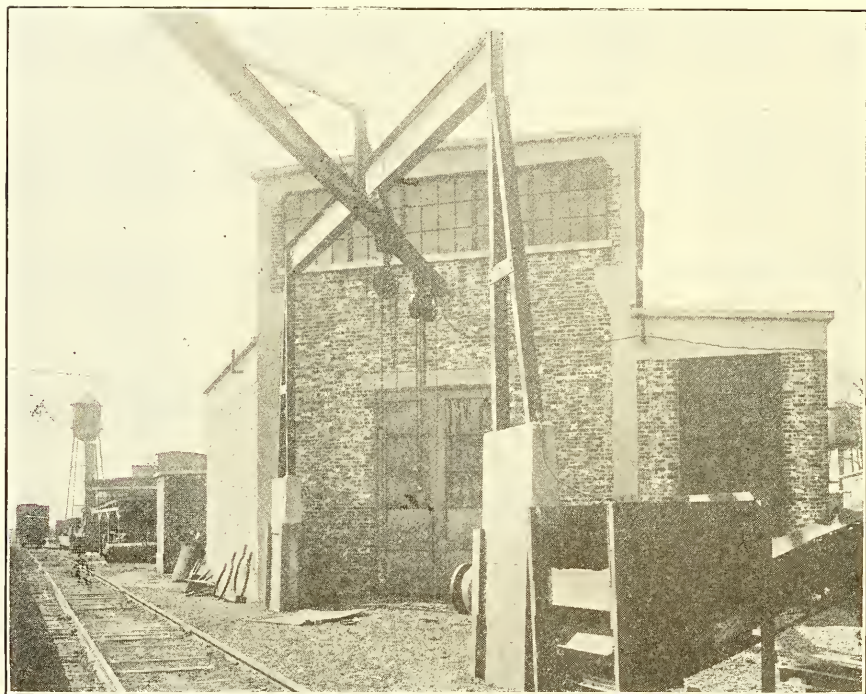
Exterior View of Oxweld Shop, Showing Crane Hoists.
